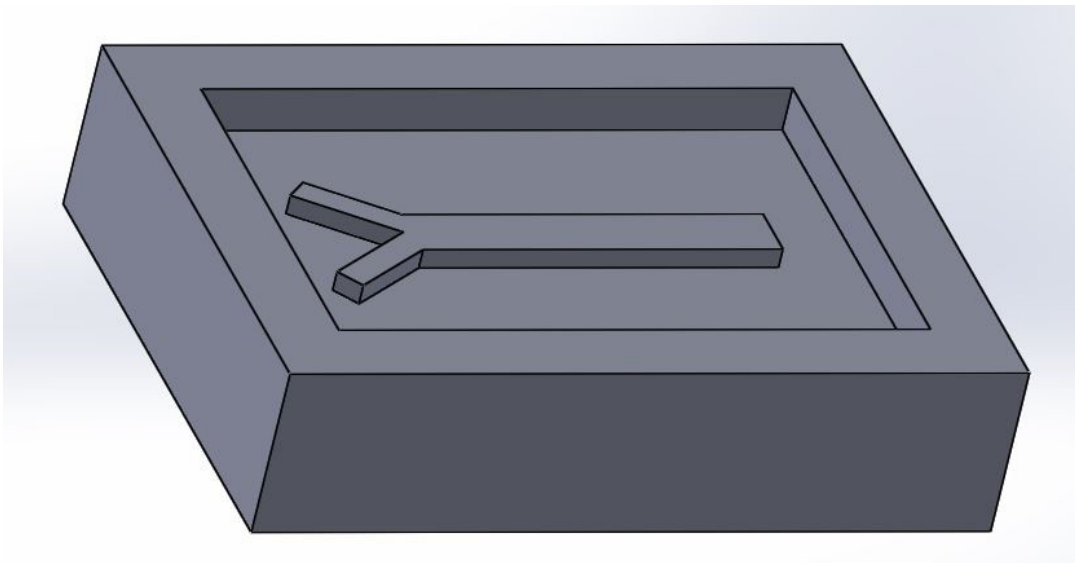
The Mold Design for Microfluidic Channel for Liquid Mixing Design
